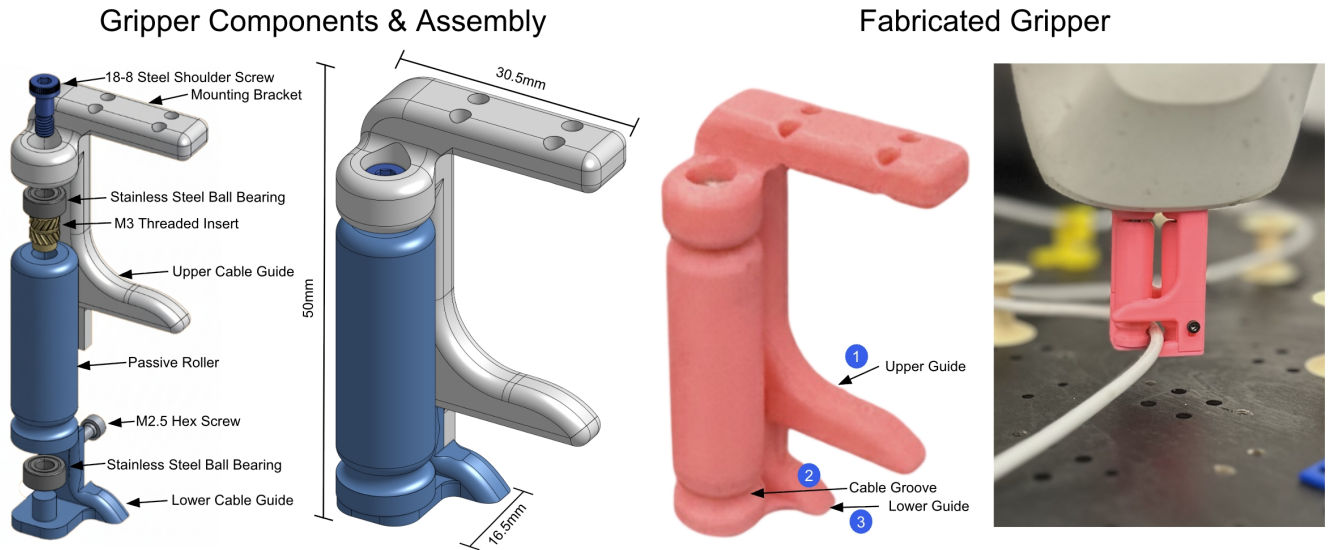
CRAFT Gripper Assembly. *Left*: Exploded view and assembled view of mechanical components in the CRAFT Gripper. *Right*: Key features of CRAFT Grippers: 1) Upper Guide 2) Cable Groove 3) Lower Guide. Fabricated CRAFT Gripper jaws printed using polylactic acid (PLA) filament and installed on an ABB robot.
